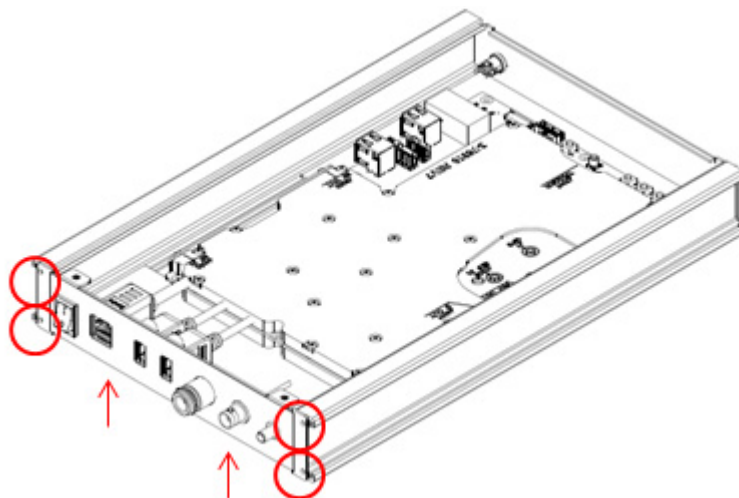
6 Screws Securing Front Panel to Side Panels and SPA Mounting Plate
